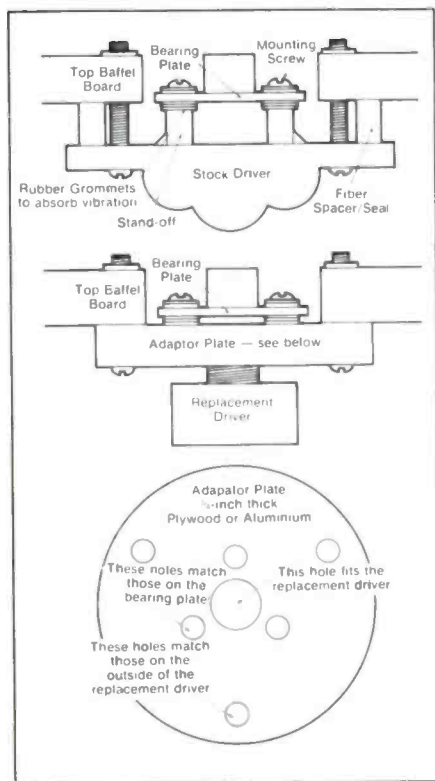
High-frequency driver modifications. Top: standard driver and adaptor plate. Center: changes necessary to accommodate replacement driver. Bottom: layout of special adaptor plate.
